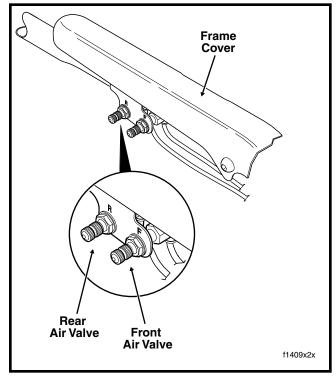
Front/Rear Air Suspension Air Valves (Under Protective Caps)
